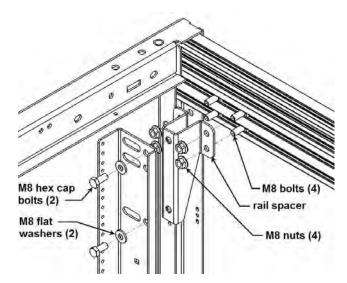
Equipment mounting rail for 700 mm wide cabinet
